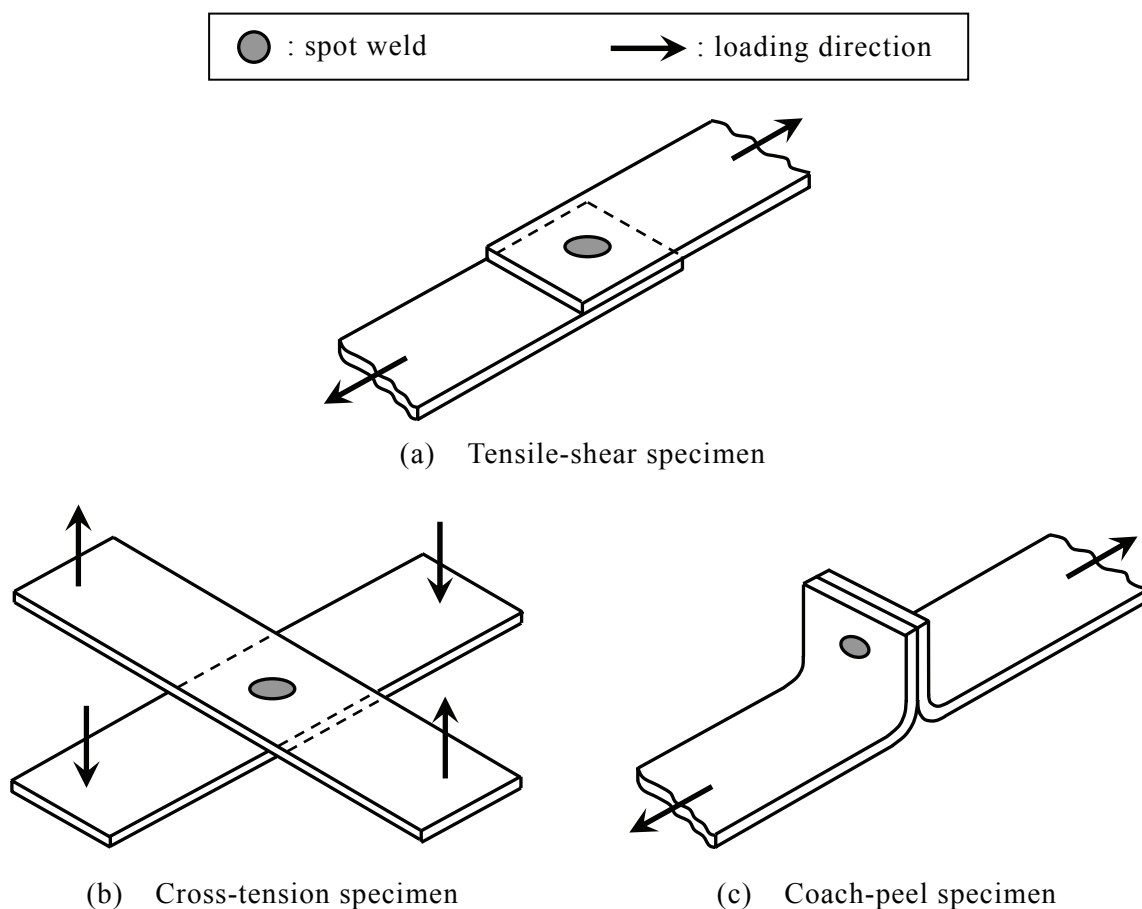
Schematic illustration of typical specimens of spot welded joint.
